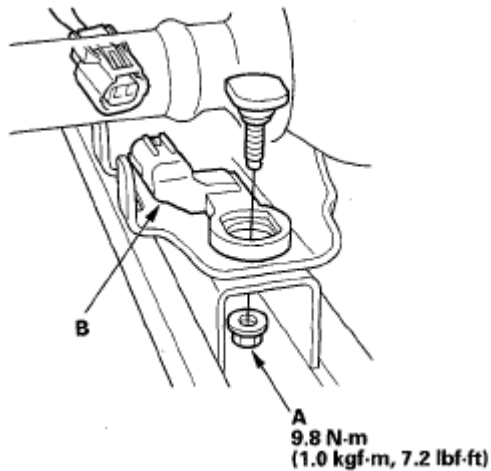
Identifying Left Side Driver's Seat Position Sensor And Fastener With Torque Specifications
